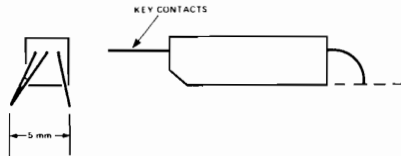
Shaping the key contacts. Each key should be firmly gripped at its sides when splaying the contacts, to avoid breaking the rivets. The leads should be level with the contact base. Before soldering, place the key contact on a flat surface to check that the leads are level. The key contacts can now be glued to the PCB with the same epoxy resin adhesive as before.
